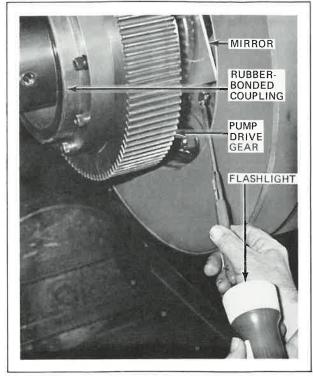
CHECKING PUMP DRIVE GEAR MATCH MARK NUMBERS.
